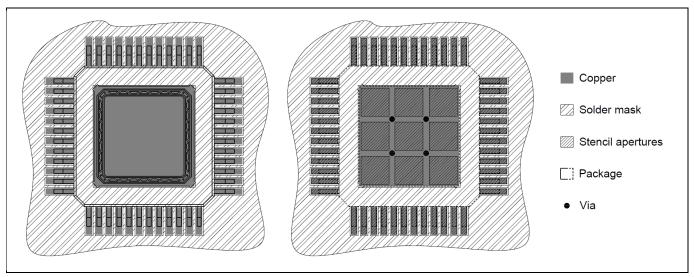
Example of a pads and stencil design for QFP. The outer extension of the exposed pad including the anti-flash profile is used as the reference for the PCB pad (left). Potential vias-in-pad should be placed in between the stencil apertures to avoid solder flowing into the vias (right).
